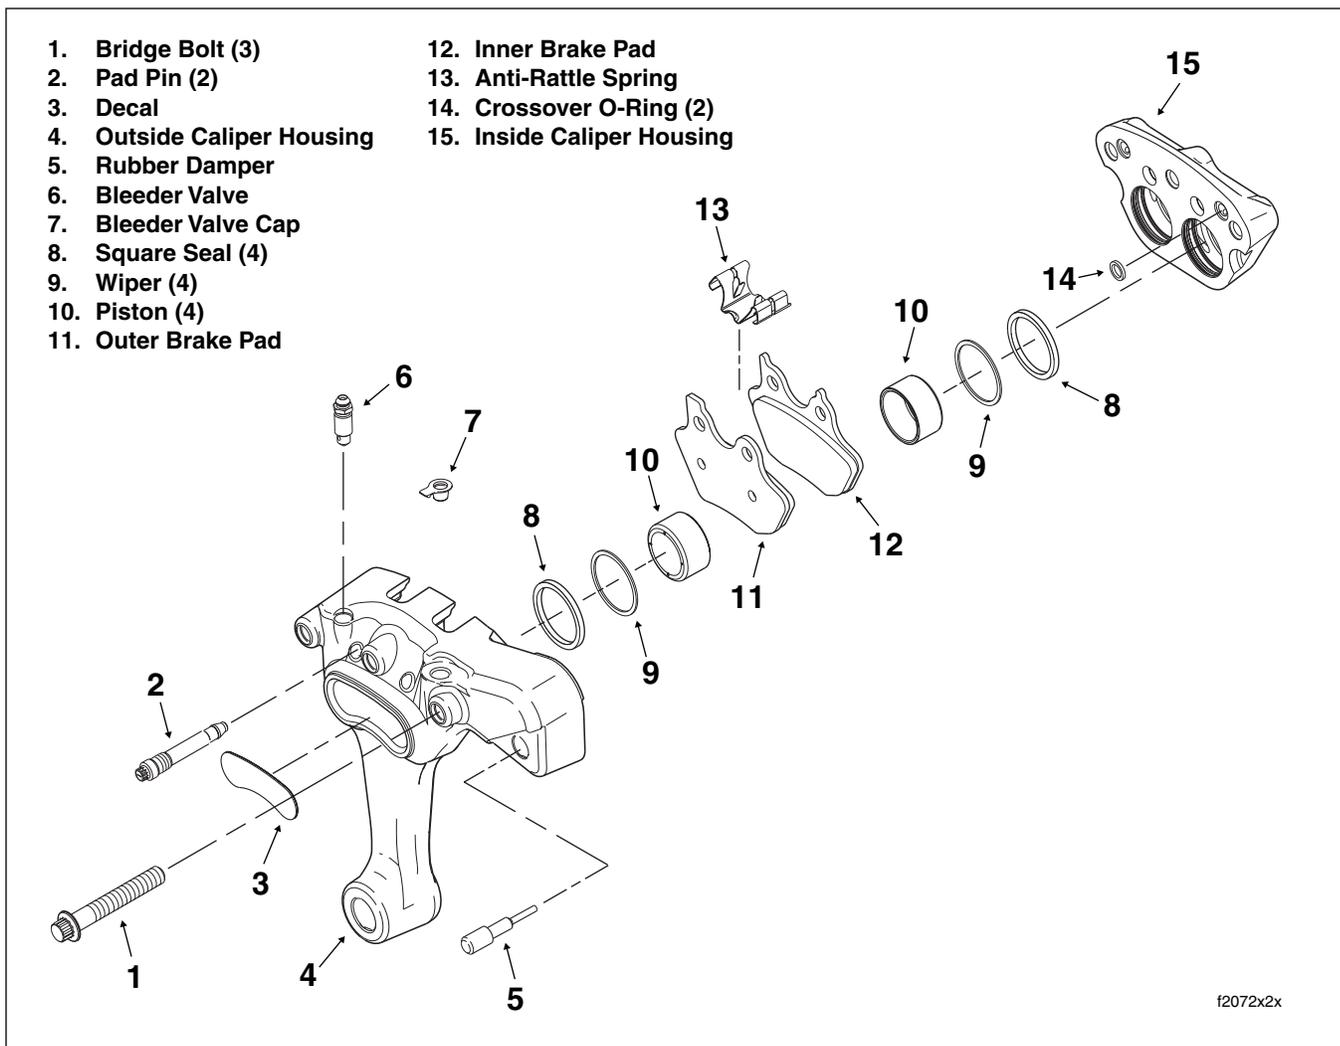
Rear Brake Caliper Assembly (Right Side)
